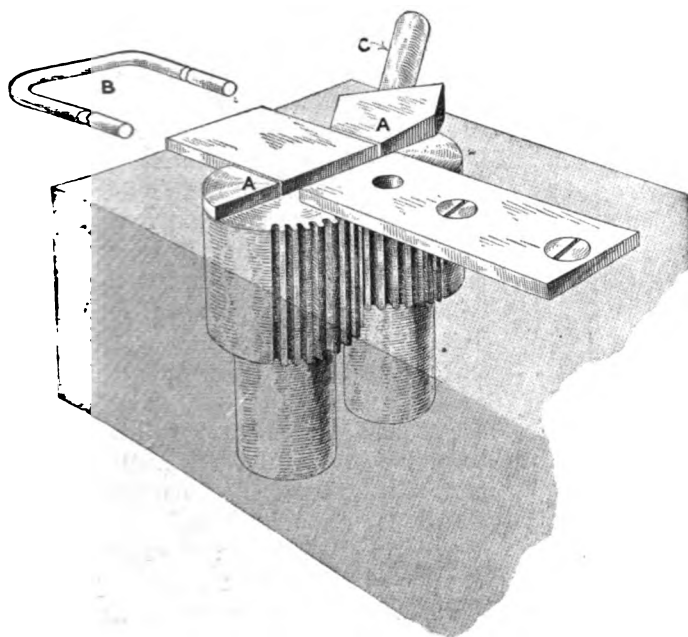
MACHINE FOR BENDING TWO RIGHT ANGLES
